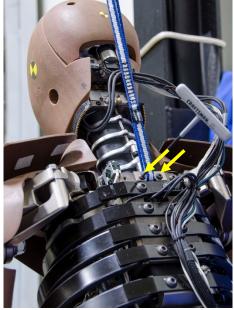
Install lifting strap bracket to upper thoracic spine box weldment
